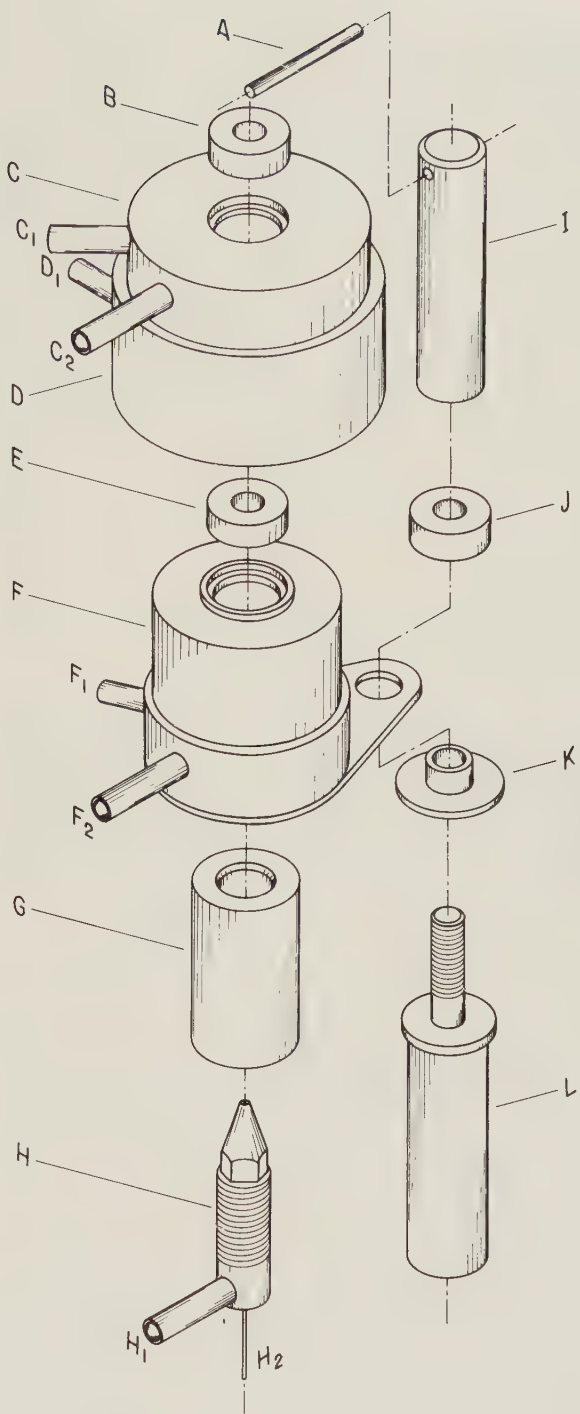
EXPLODED VIEW OF SOLUTION PLASMA JET
